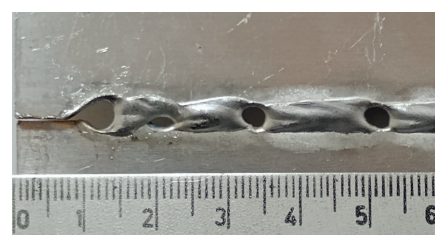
Butt joint of 1,5 mm thick sheets using the MIG method
